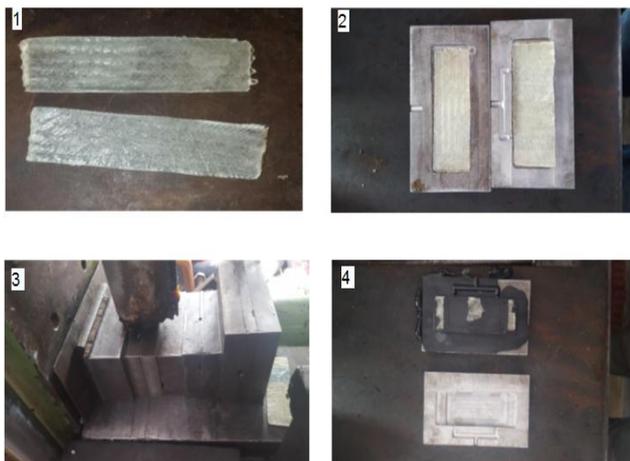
Fiber inserts, 2. Fiber inserts in Die, 3. Injection Moulding Process and 4. Solidification
